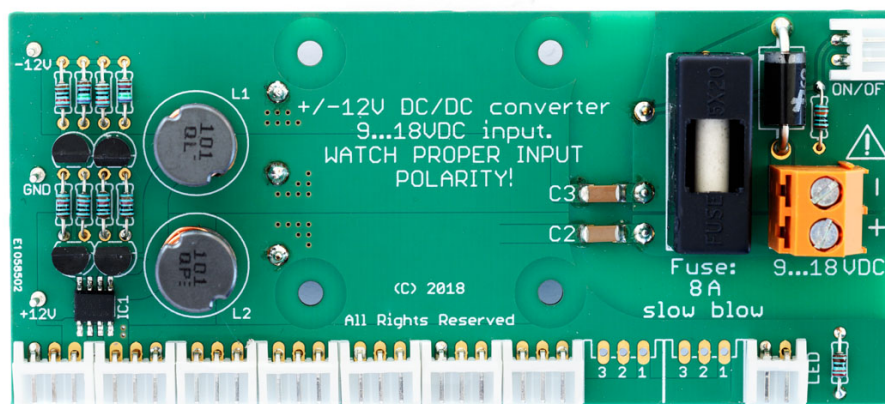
Power supply viewed from the top. Some parts are soldered from the other side, e.g. the DC/DC converter module.
